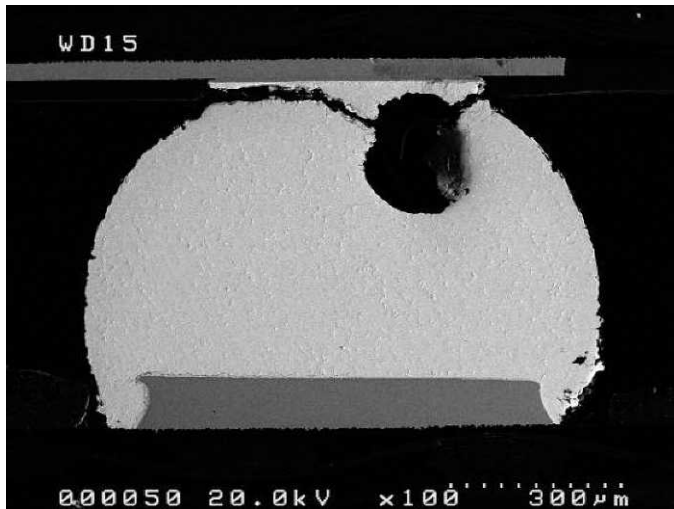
BGA with SAC305 on ENEPIG finish, 170°C T_g board.
